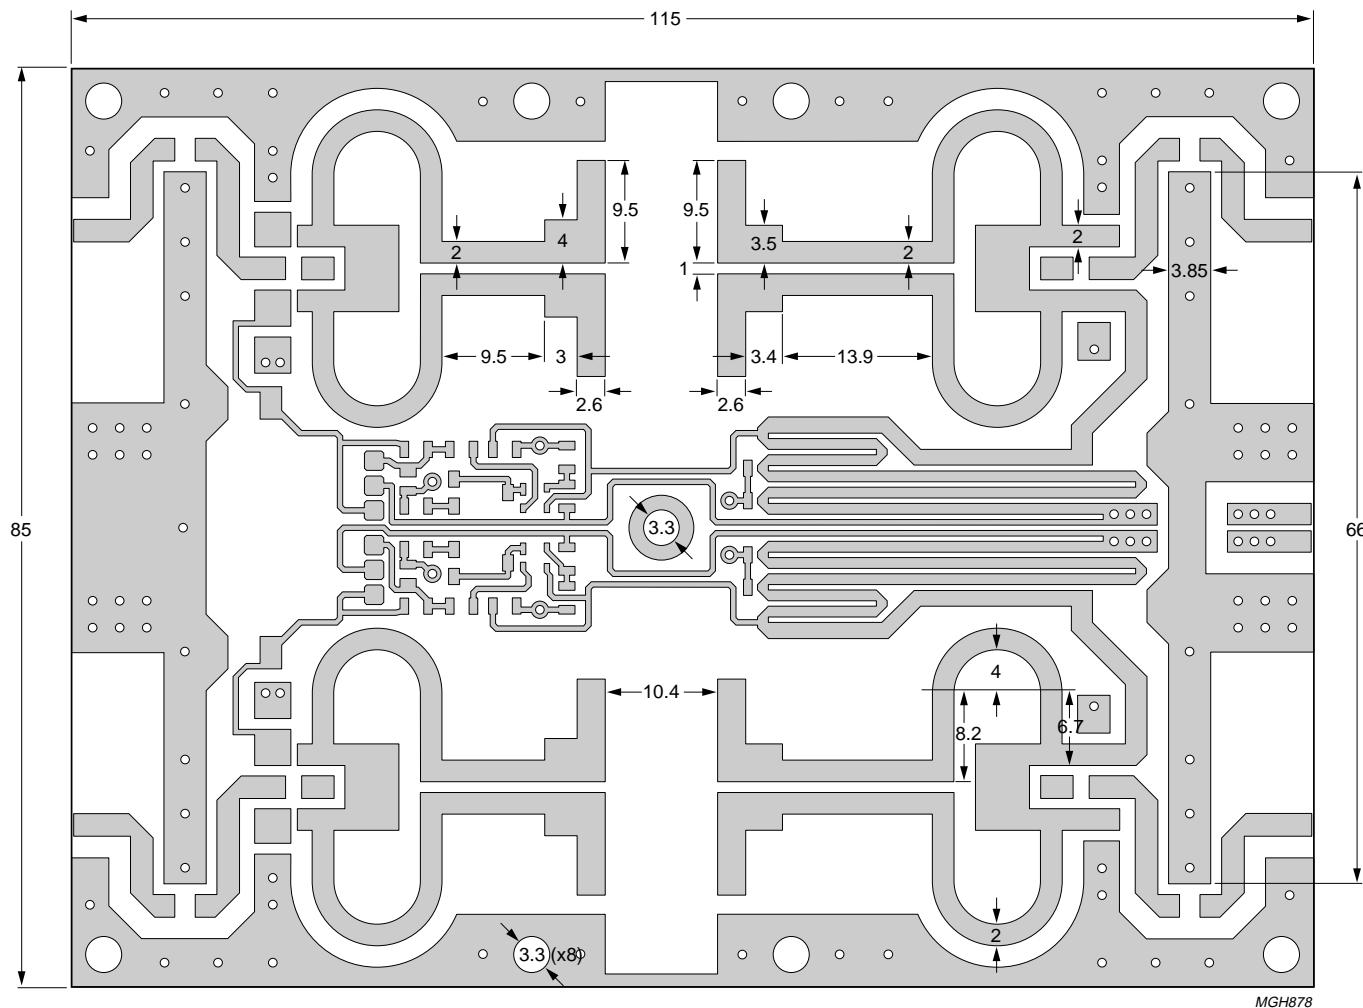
Printed-circuit board Dimension of the BLV859 amplifier.
